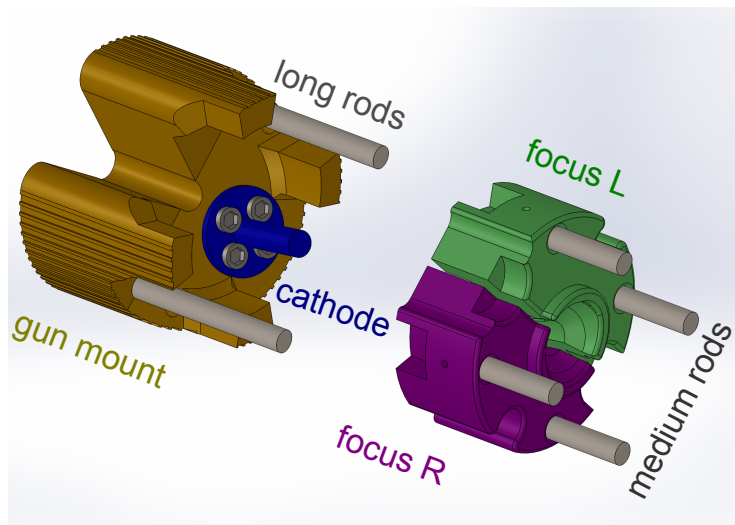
First assembly step of the OAG. The gun mount, the rods and the focus electrodes are made of MA-COR, ceramics and molybdenum respectively.
